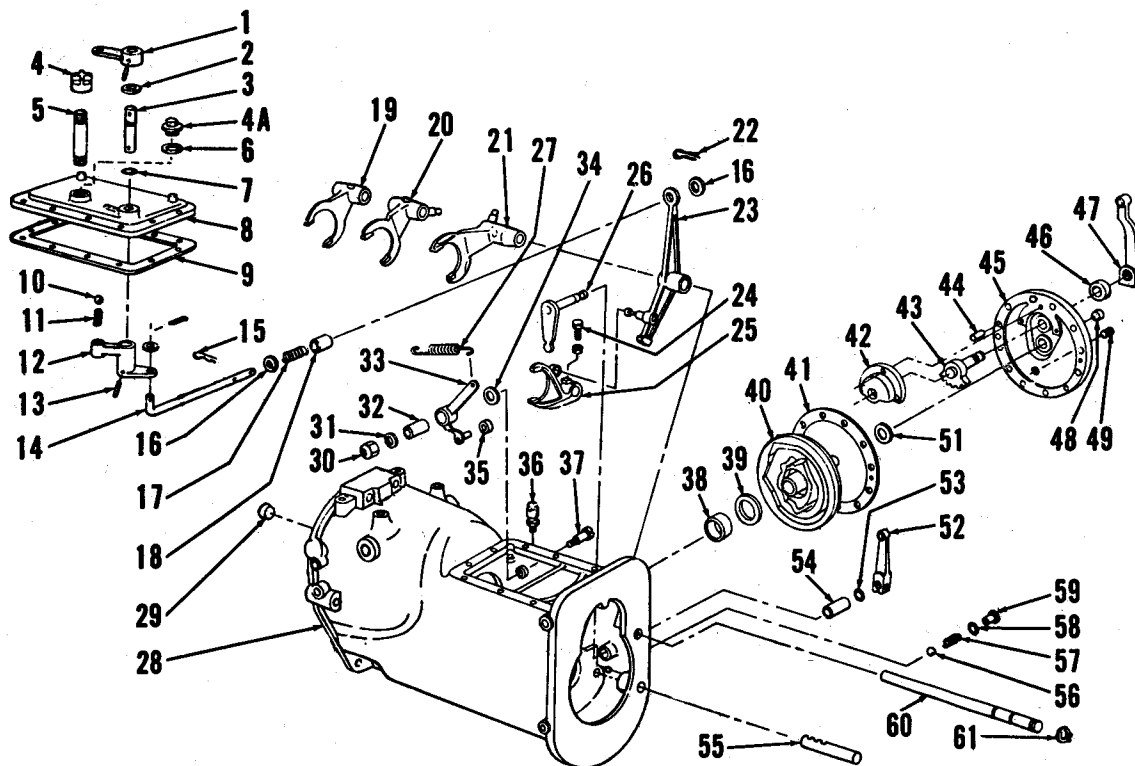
Exploded view showing transmission housing, top cover and brake linkage, shift cover, shift cam, shift forks and rails. Refer to Fig. 160 for exploded view of gears and shafts with rear cover, bearings and seals and front bearing supports. Index lever (33) acts as detent for shift cam (40); there is no neutral detent position for the shift cam. Three detent notches in high-low shift rail (55) provides transmission neutral position as well as high and low range detent positions.
